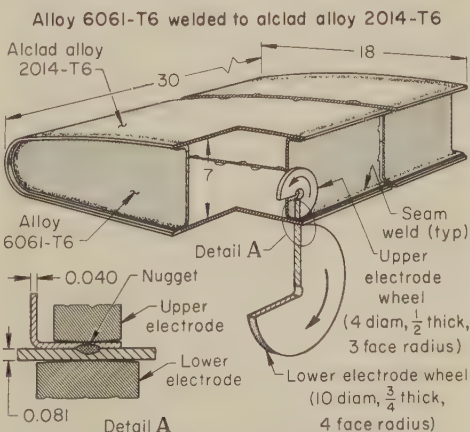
Resistance seam welding of an aircraft integral wing fuel tank, using continuous electrode motion
